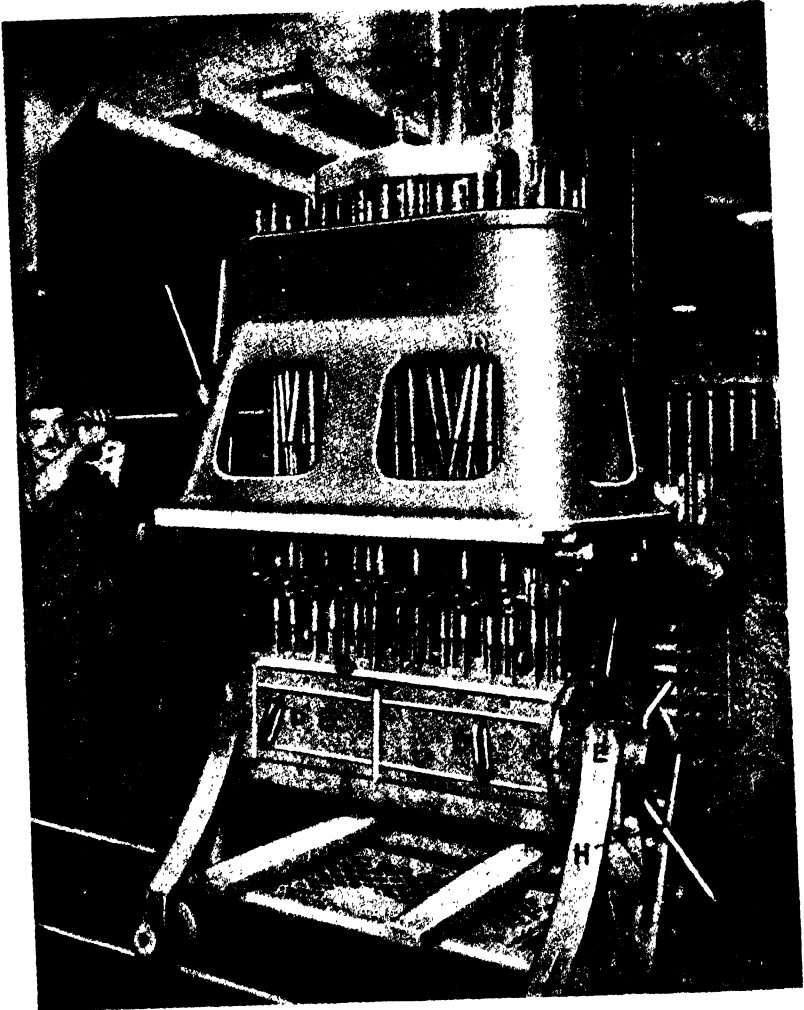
“TRUCK” JIG BENEATH A MULTIPLE SPINDLE DRILLING MACHINE.
